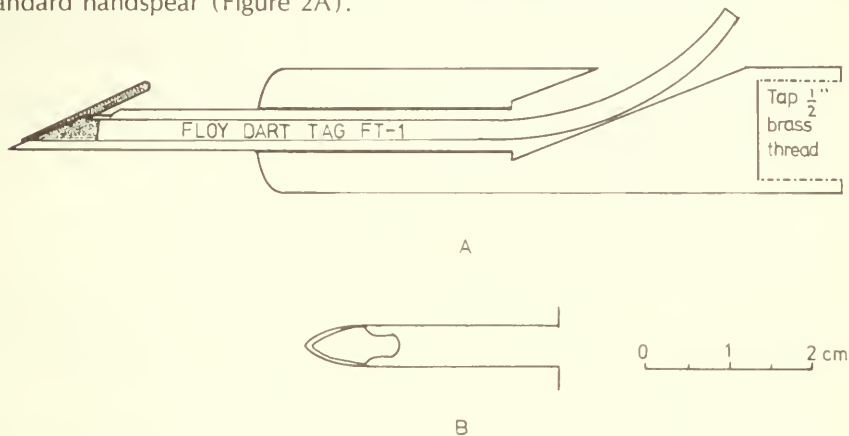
Dimensions of tagging head and needle. A. Sectional view of tagging head complete with tag; B. Plane view of needle tip.
